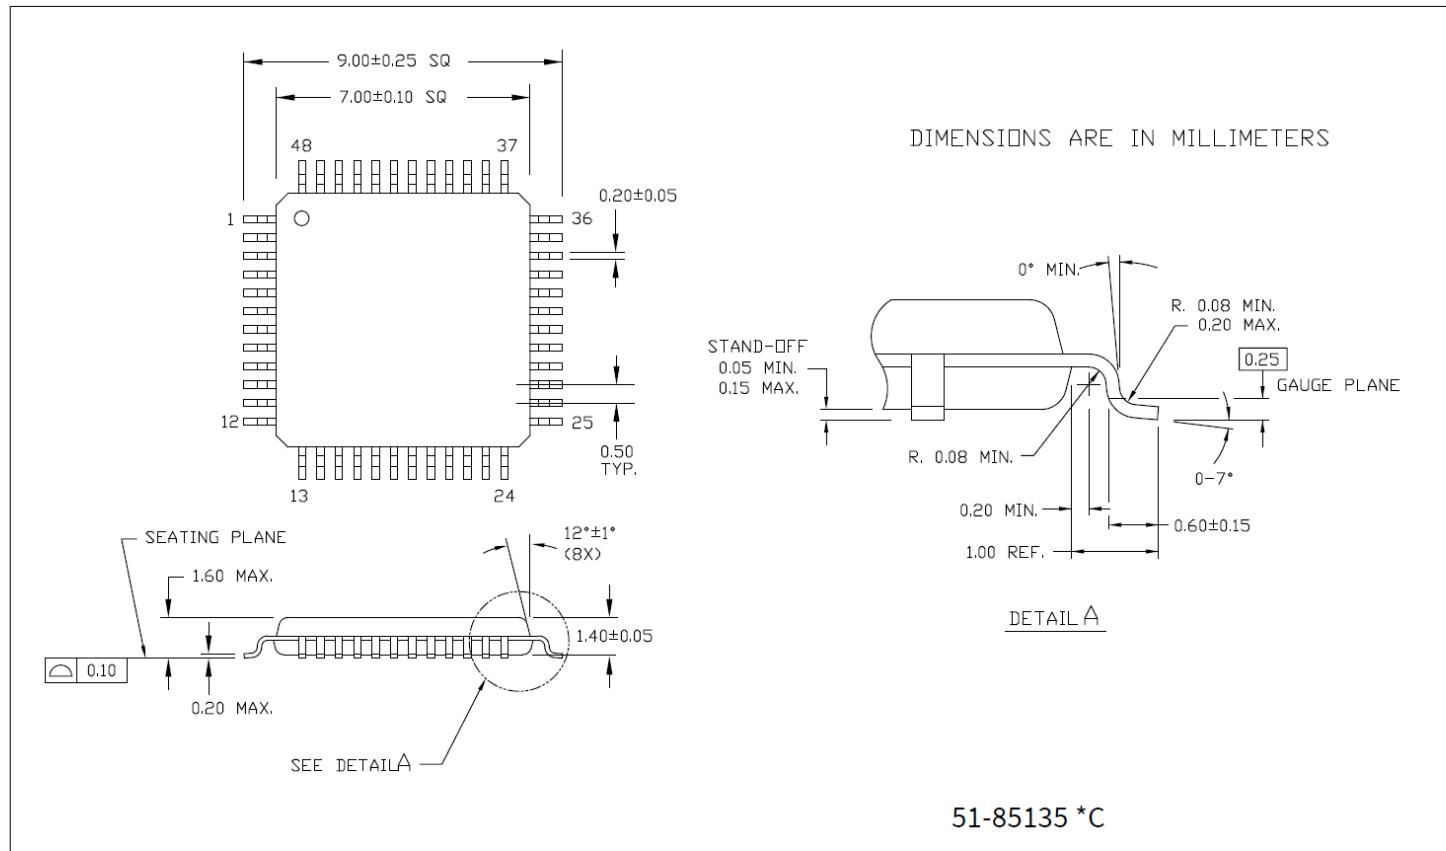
48LD TQFP 7x7x1.4 MM A48 package outline (PG-TQFP-48), 51-85135
